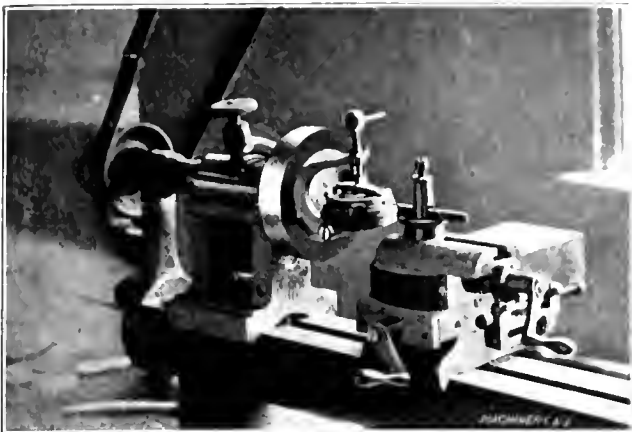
Bench Lathe with Quill for Holding Works while Uprighting the Stem Holes
